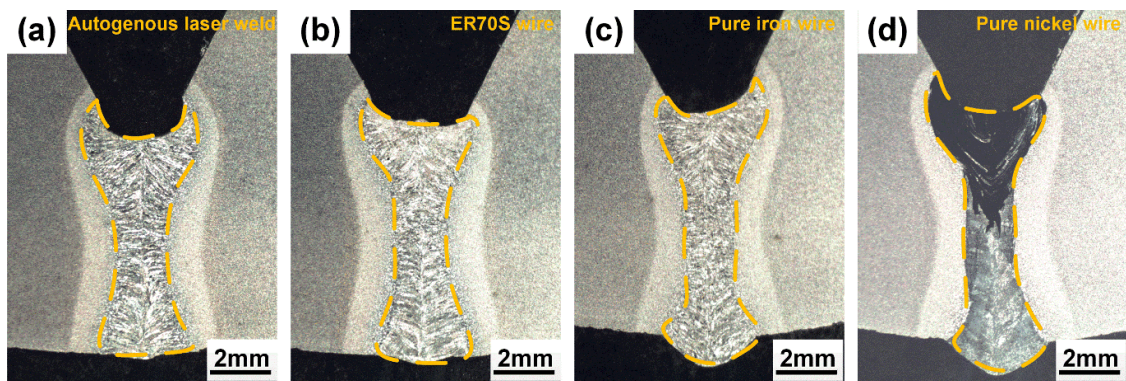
Cross-section morphologies: (a) autogenous laser weld; (b) laser weld with ER70S wire; (c) laser weld with pure iron wire; (d) laser weld with nickel wire.
